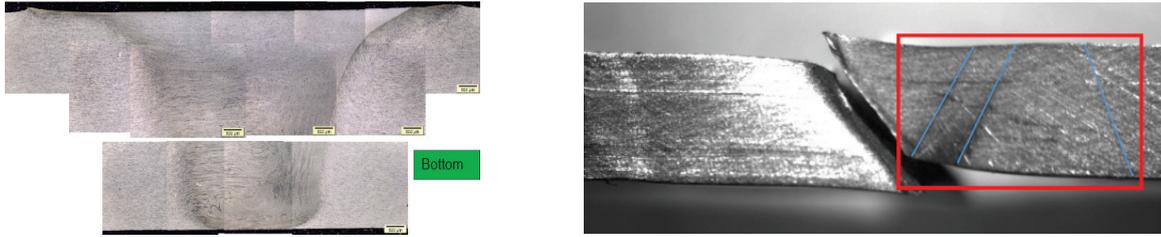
FSW microsections of 5028H116. The blue lines indicate the position of weld zone. Fracture started from the edge of the weld zone under an angle of 45° in direction of the base material.
